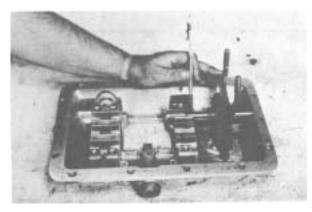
Using a small magnet remove the 1st and reverse shift fork rod lock pin.
